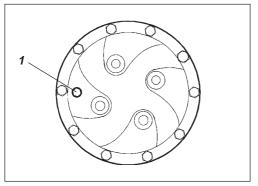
Oil level check – planetary gear (CA 512 std) (CA 262-362 optional) 1. Oil level/Filler plug
